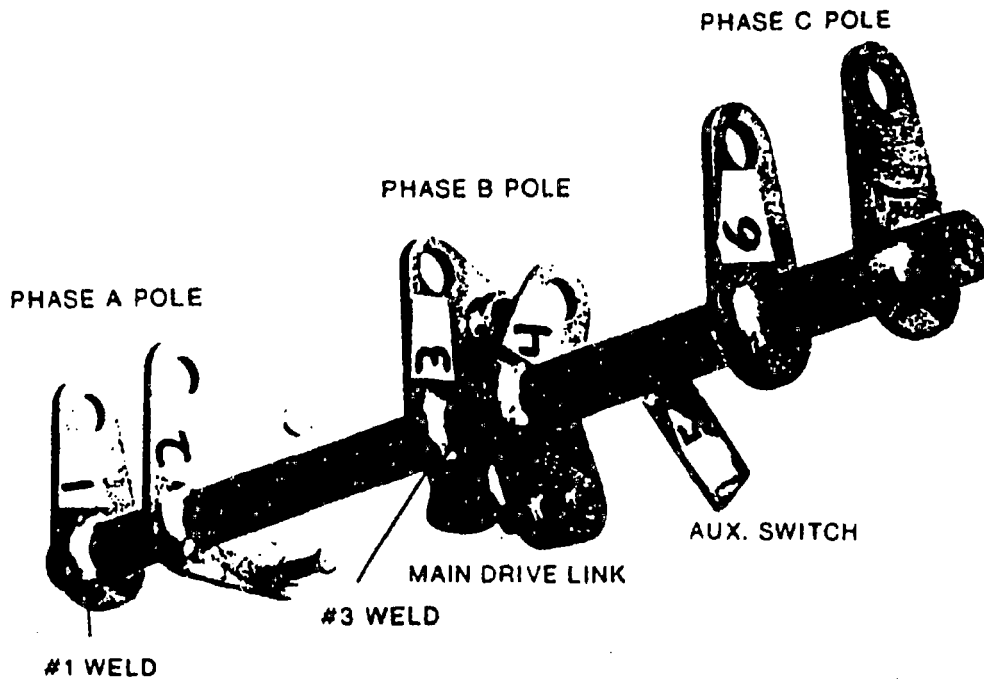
Pole Shaft with Seven Levers Welded on to it
